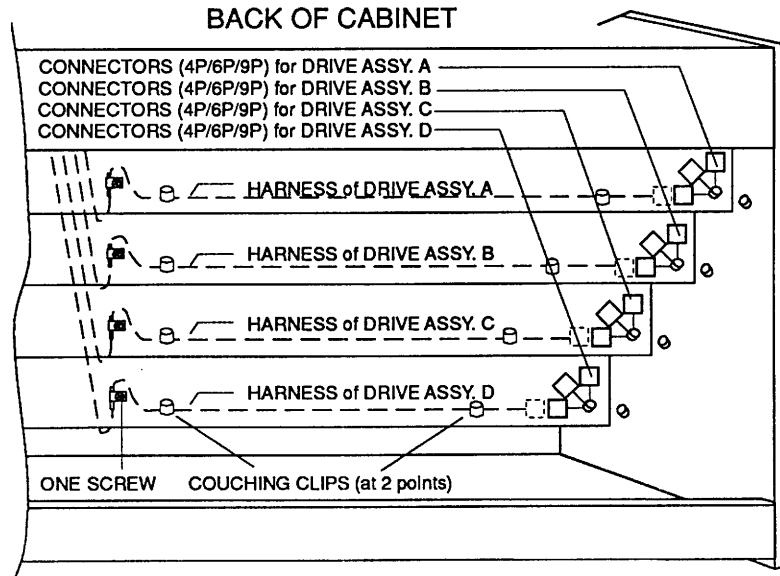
, DRIVE ASSEMBLY HARNESS
